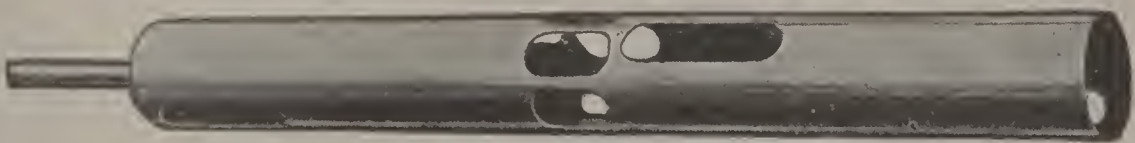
Rotating Inlet Valve of Roberts Two-Cycle Motor
